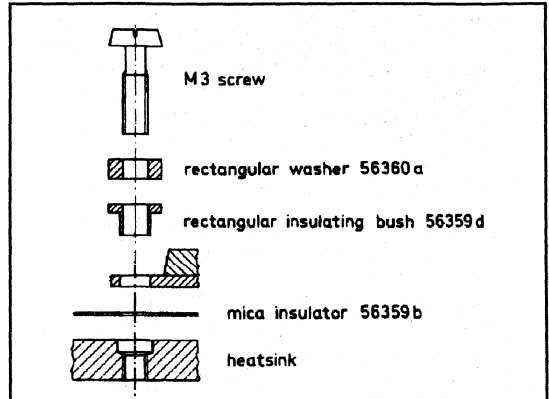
Insulated screw mounting with rectangular washer into tapped heatsink.
